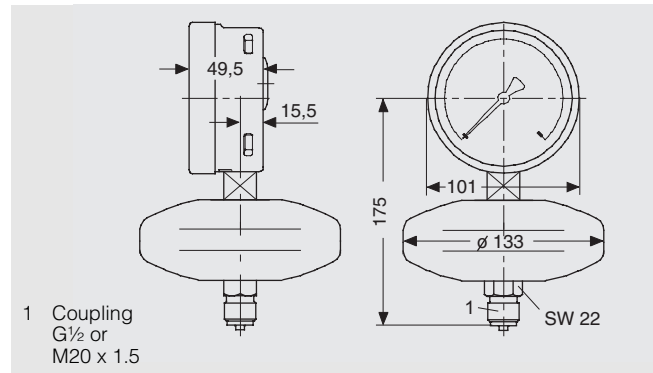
/158 Pressure gauge without supplementary equipment, dimensions
